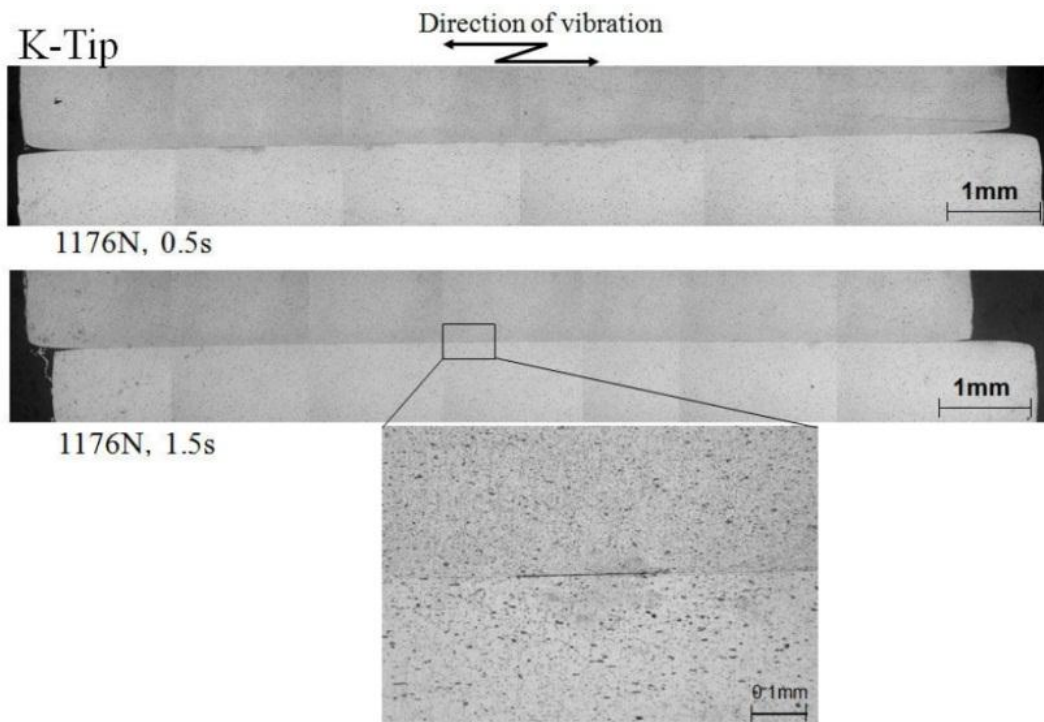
Al-Al welds produced using K-tip welding tool [39].
